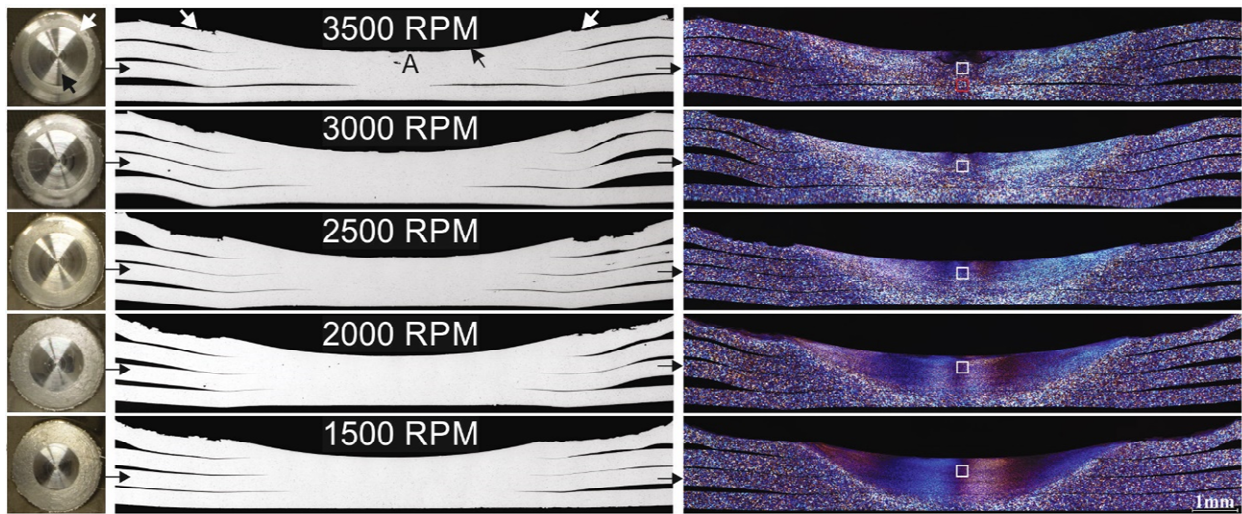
Macrographs and cross-section view of the welded joints at different RPM
